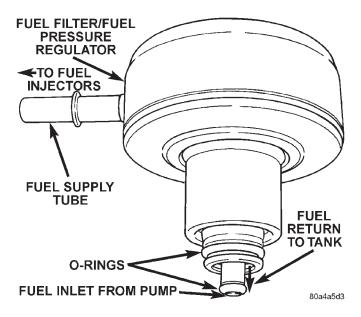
Fuel Filter/Fuel Pressure Regulator O-Rings
